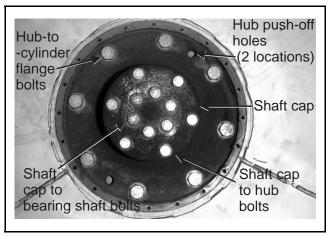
(MSSM0275AE) Identifying Bolts and Shaft Cap
